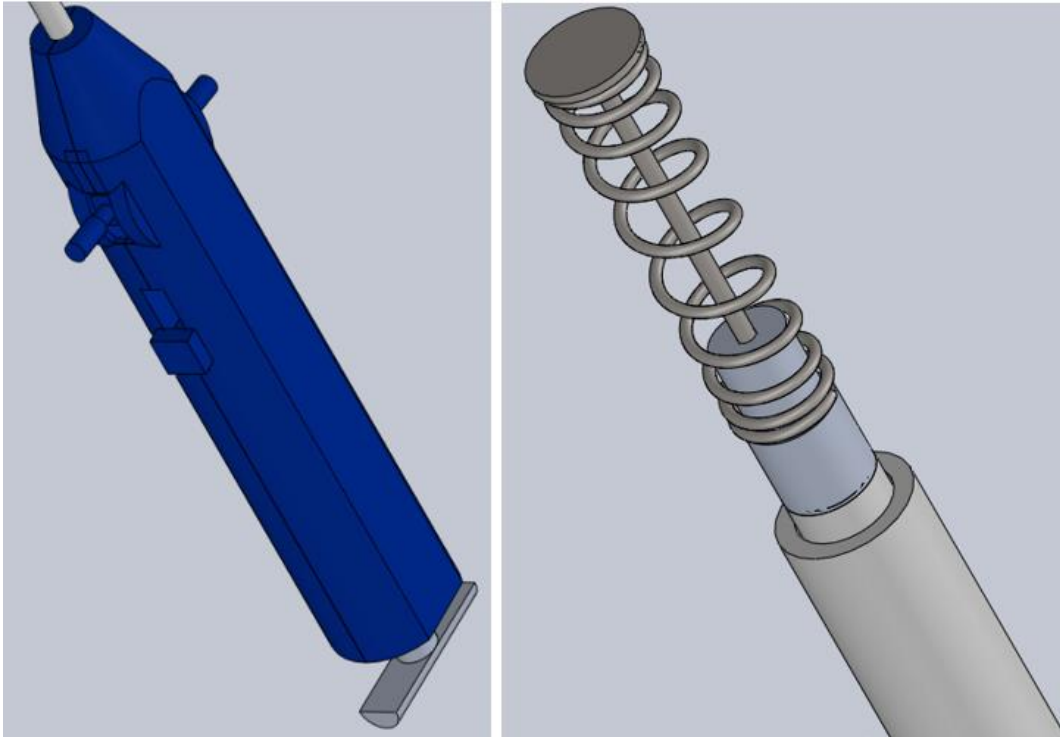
Close Isometric Views of the Handle Assembly (Left) and Snare Assembly (Right).
